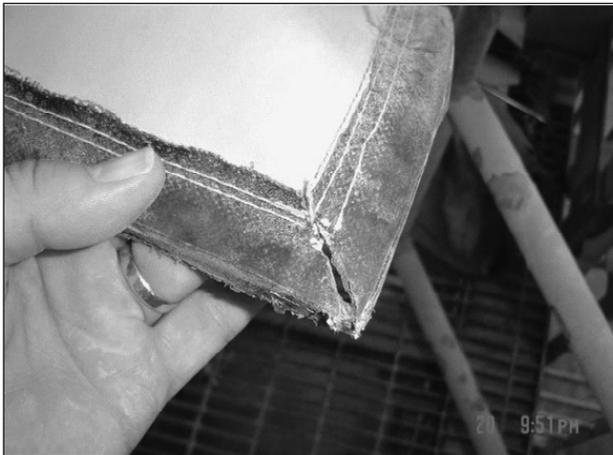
Frame-Trak® gasket splitting at mitred elastomer weld
